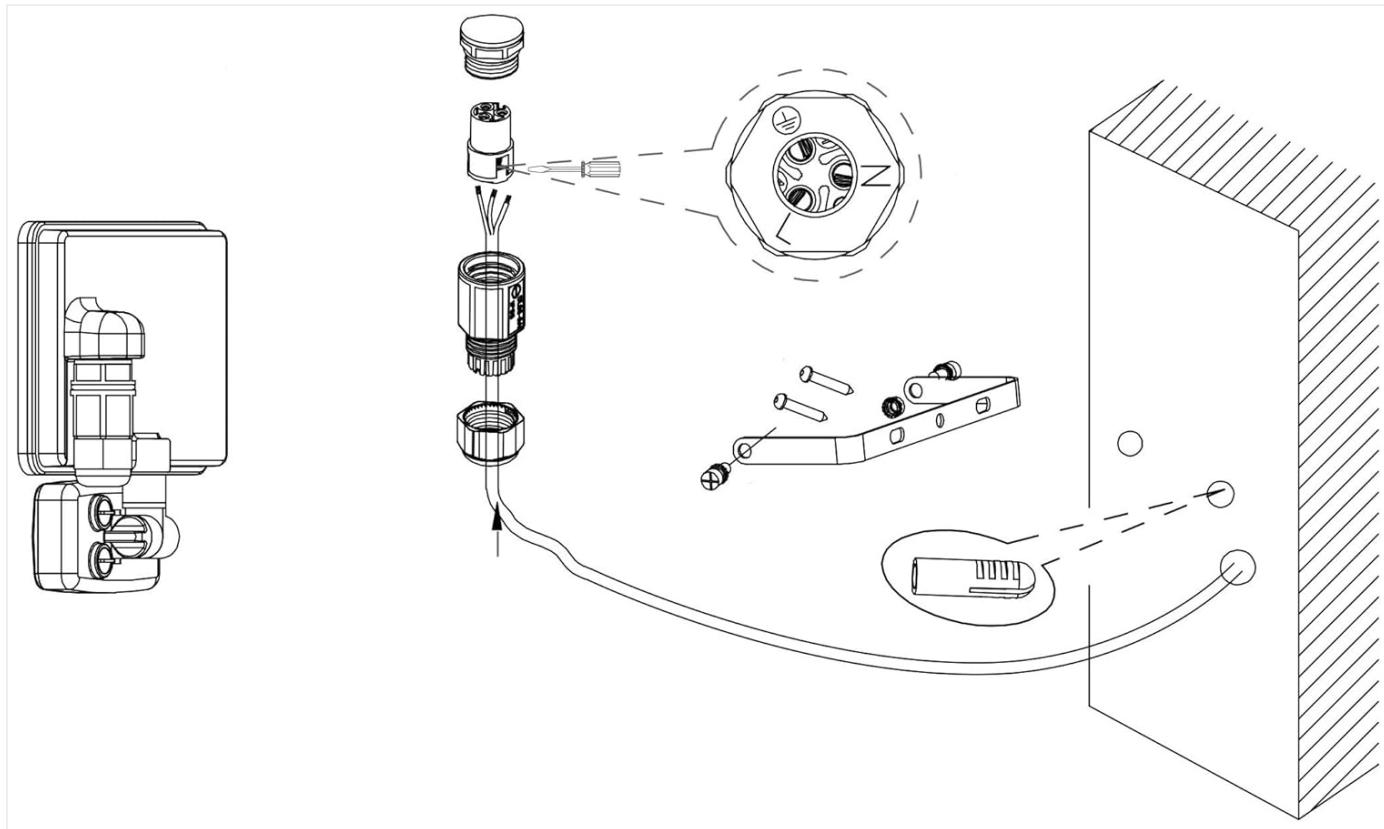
Installation Diagram. This diagram illustrates the steps for mounting the fixture, including detaching the mounting plate, marking drill holes, securing the plate, connecting electrical wires (Live, Neutral, Ground), and reattaching the fixture to the plate.
